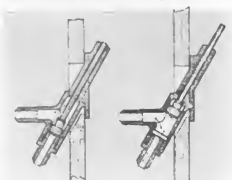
The Morris dash oil indicator, which shows whether the lubrication system is working by the position of the end of the piston stem
